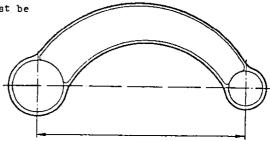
Dimension for which the tolerance must be specially agreed
